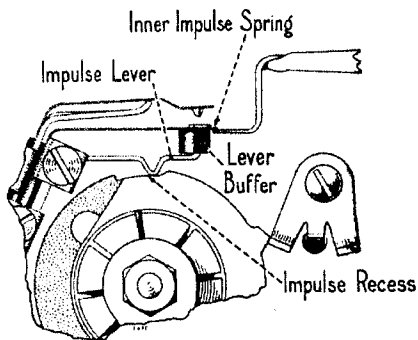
CHECKING TENSION OF INNER IMPULSE SPRING (TENSION GAUGE SET AT 5 GM.)
